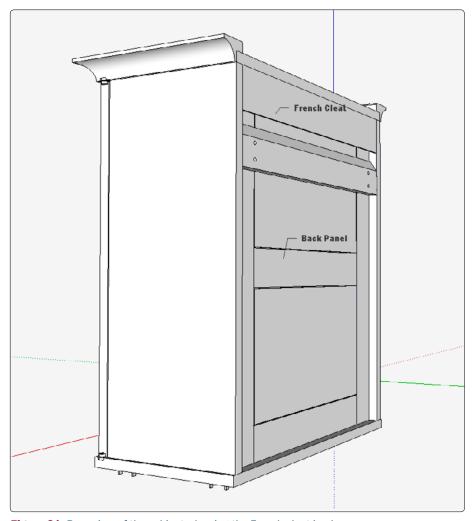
Rear view of the cabinet, showing the French cleat in place.
